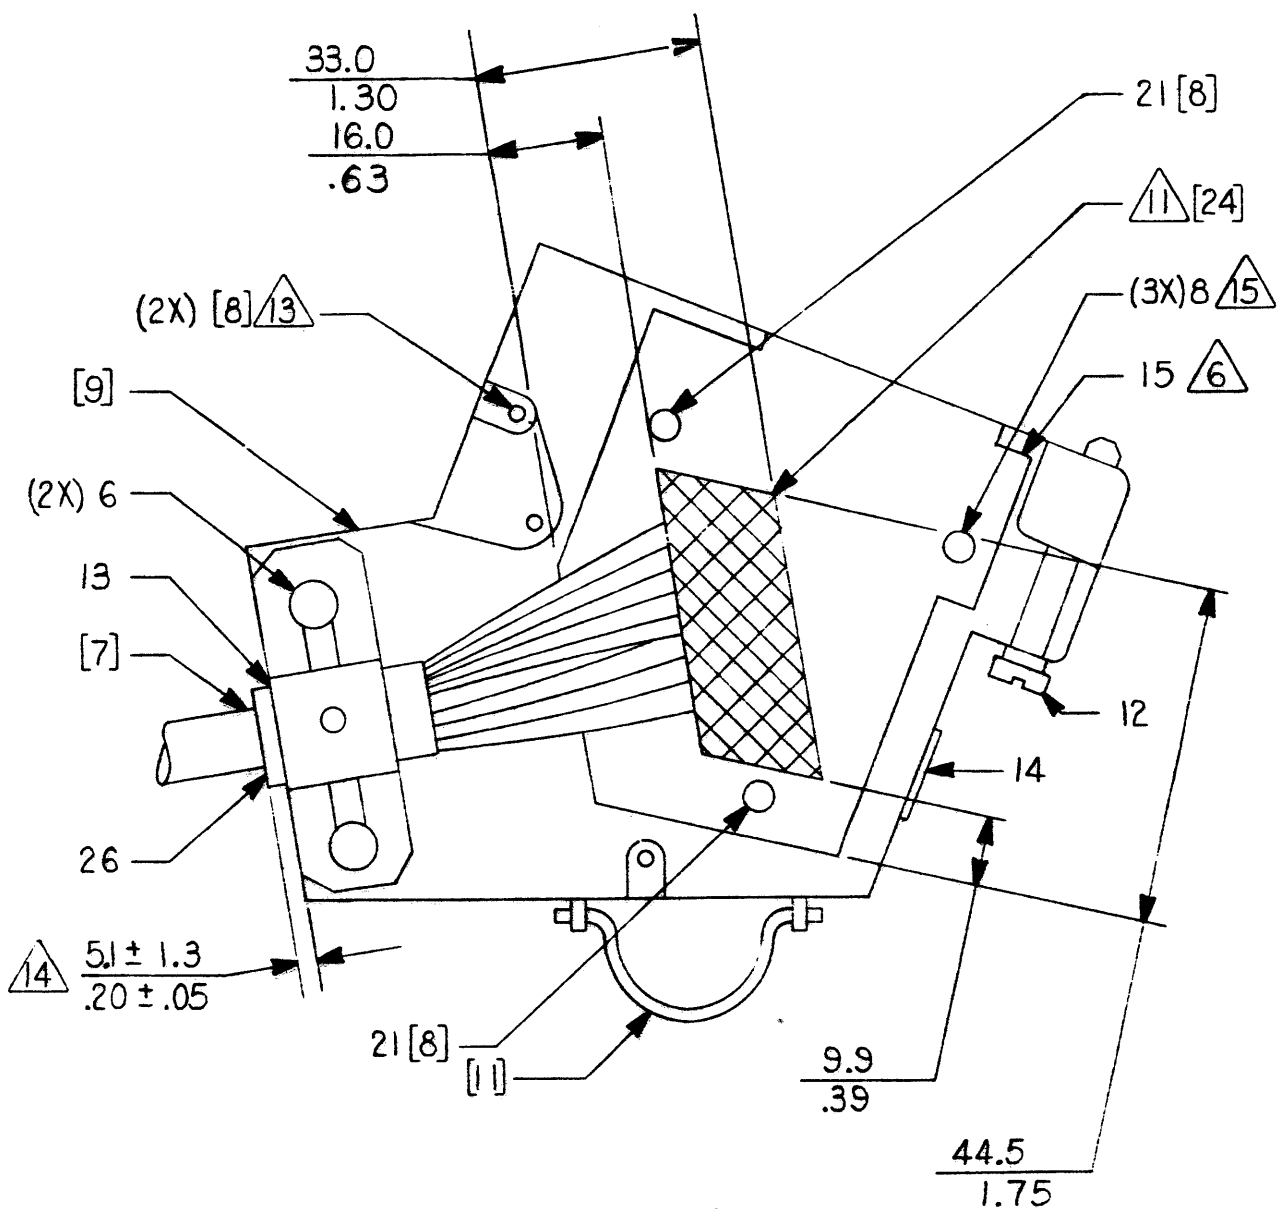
EXTERNAL CABLE ASSEMBLY - CONTINUED
